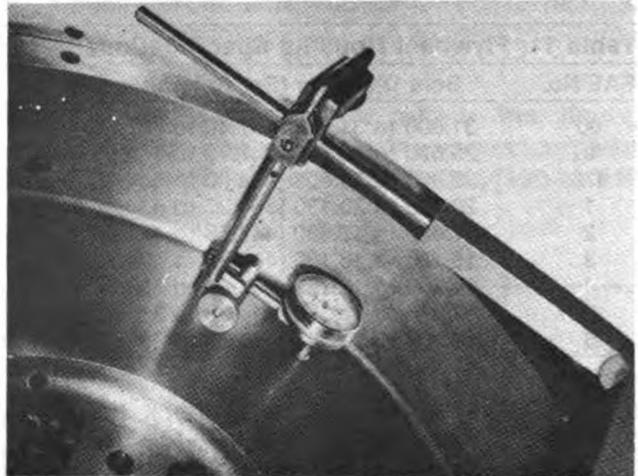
(N114139). Check The Alignment Of The Face.
